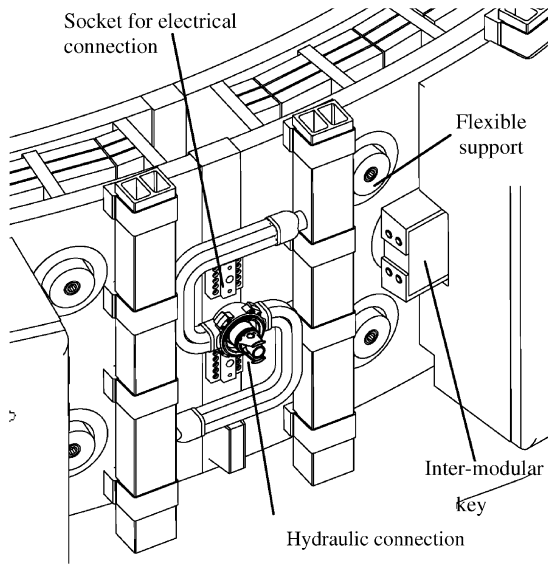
Blanket module attachments (hydraulic connection, Inter-modular keys, toroidal key, flexible support, sockets for electrical connection).
